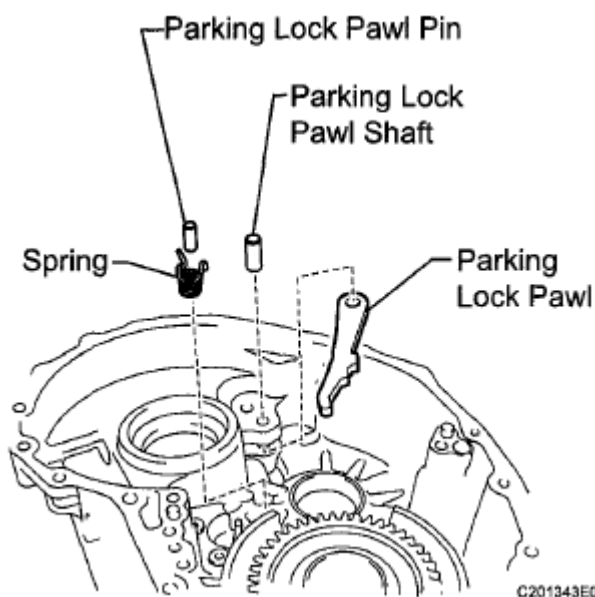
Identifying Parking Lock Pawl And Parking Lock Pawl Shaft
